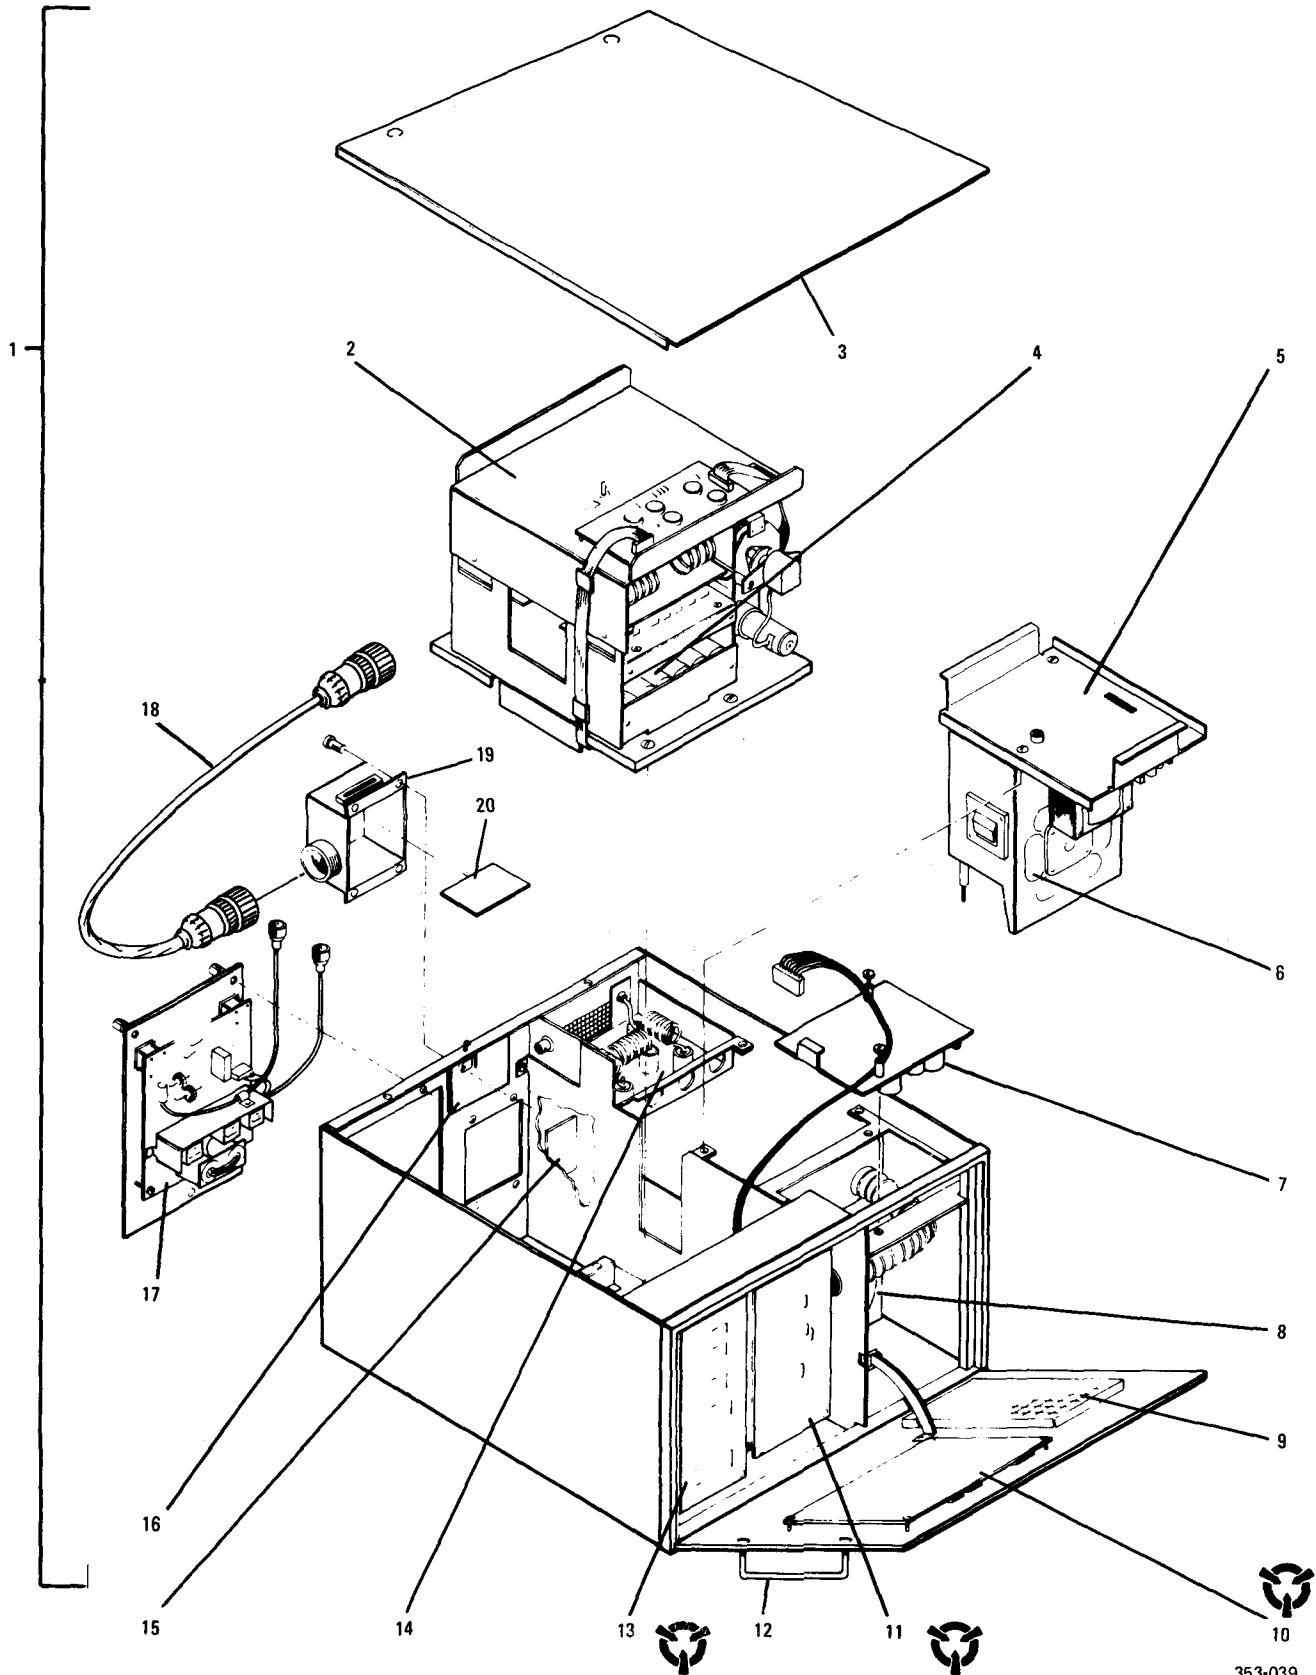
1 KW LPA, AM-7224/URC, Exploded View
